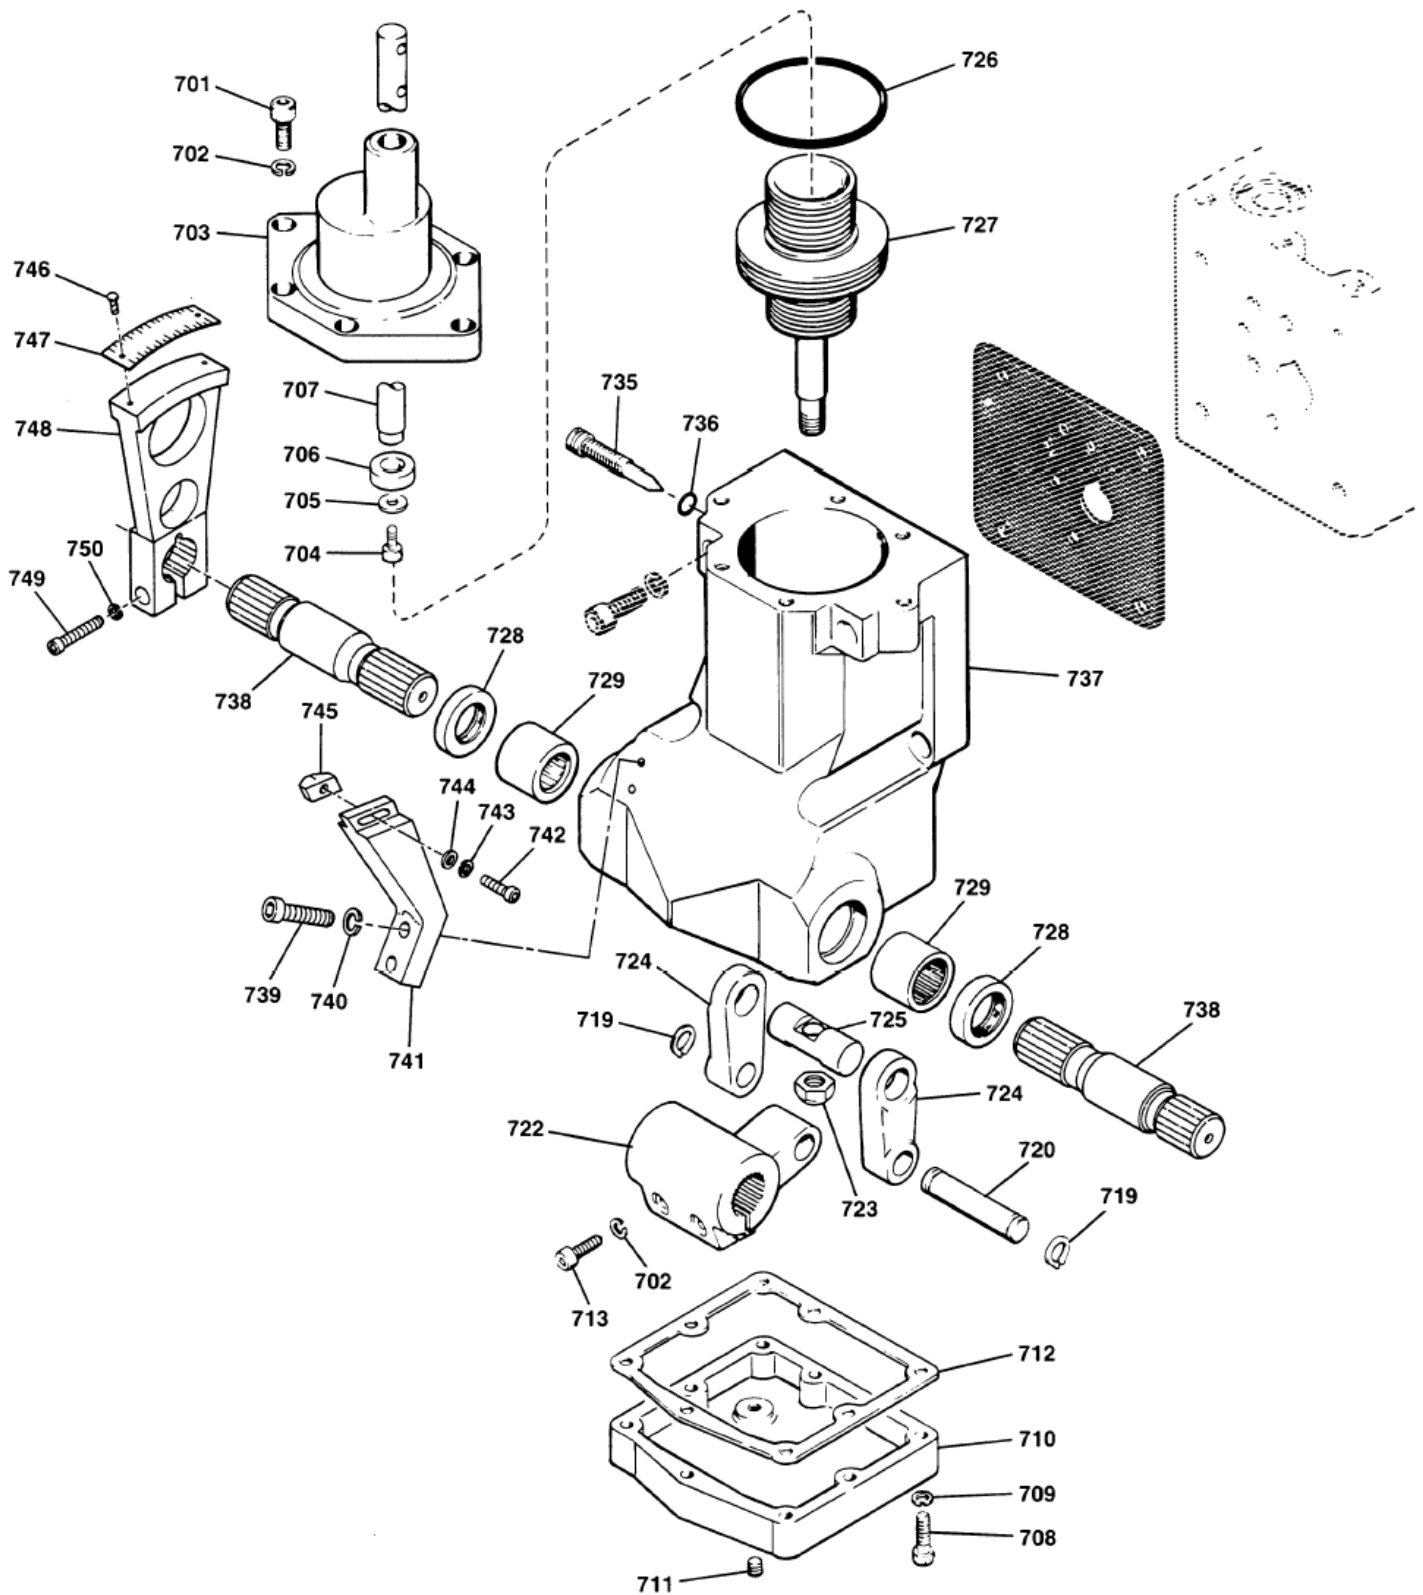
Exploded View of 29 ft-lb (39 J) Differential Power Cylinder (Rotary Output with Tailrod)
